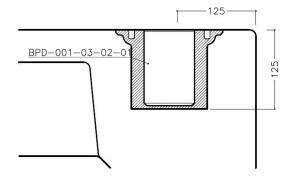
Cross-section of longitudinal ceiling beam of the unit.
